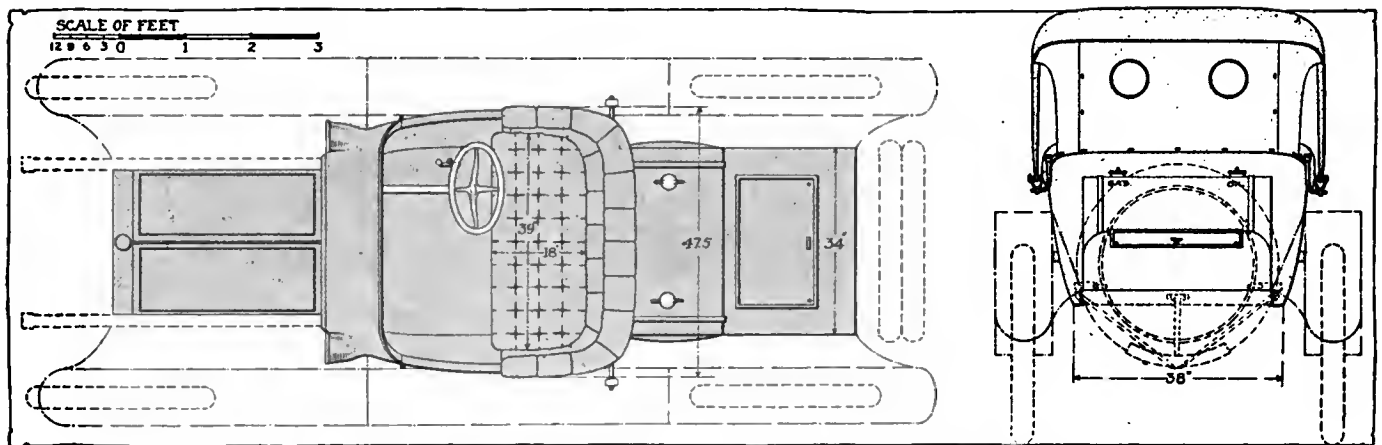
Plan and rear view, showing location of tank and locker space at rear of seat
